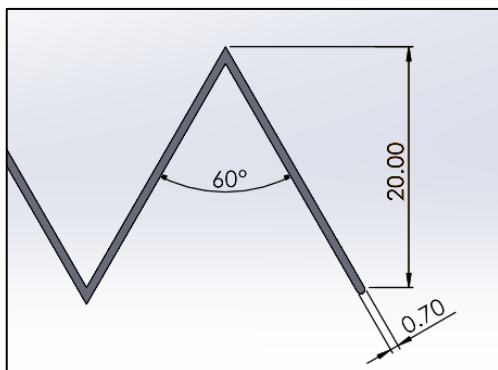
8: Dimensions of V-groove plate (all dimension in mm).
